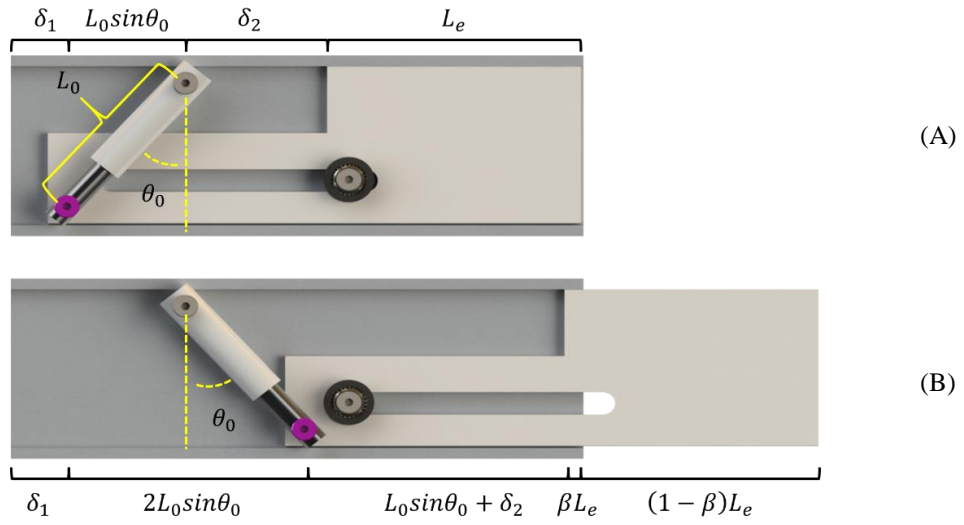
Prototype rotor schematic with dimensions specified to describe the (A) retracted and (B) extended configurations.
